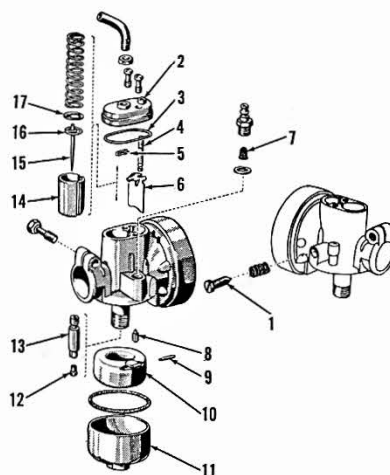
Exploded view of Bing 1/17 carburetor.
